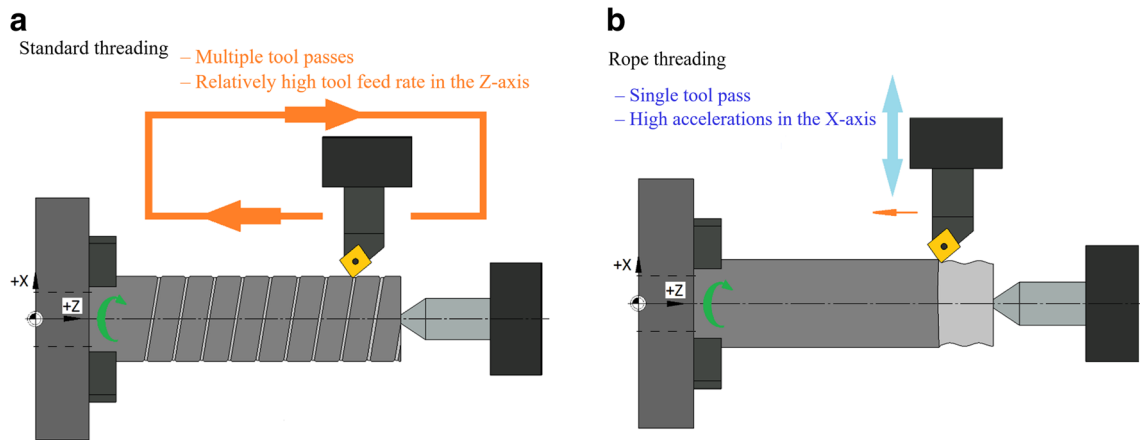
Typical solutions for smooth contour thread turning. a Standard threading. b Rope threading
